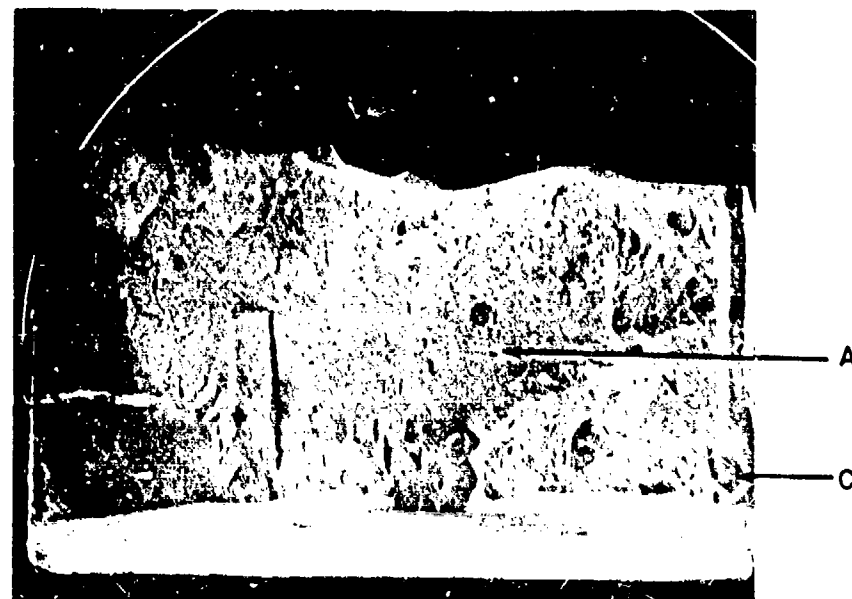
Tensile fracture surface of a hydrogen-embrittled HY-130 specimen, 9x.
